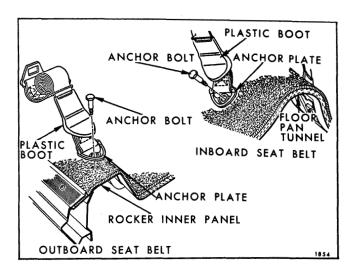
Deluxe Seat Belt Attachments -With Bail Type Retractors
